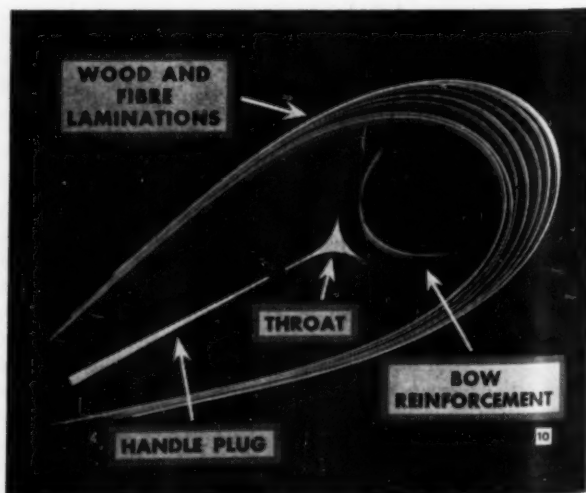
COMPONENT PARTS OF A MODERN LAMINATED TENNIS FRAME ASSEMBLED AT ONE TIME IN THE FRAME-BENDING OPERATION
